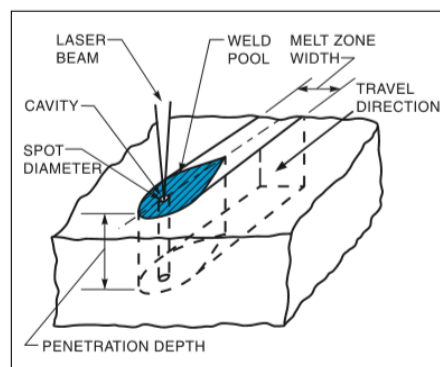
Schematic View of a Keyhole Weld (Kautz, et al., 2007)
